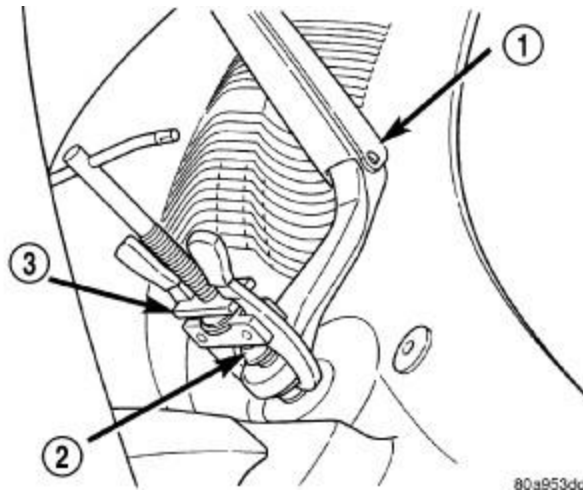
Disengaging Wiper Arm From Pivot Shaft
